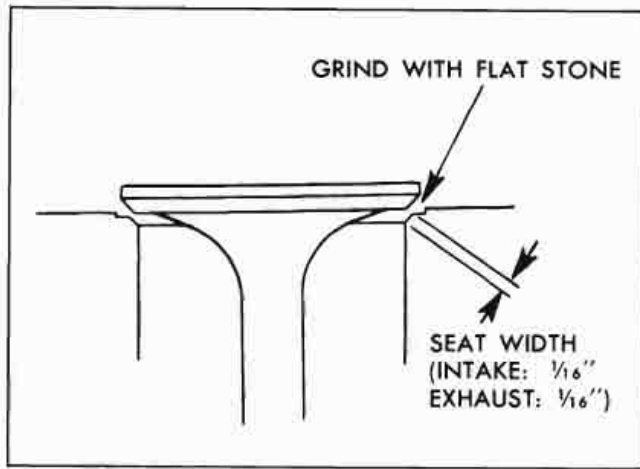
Valve Seat After Grinding with Flat Stone
